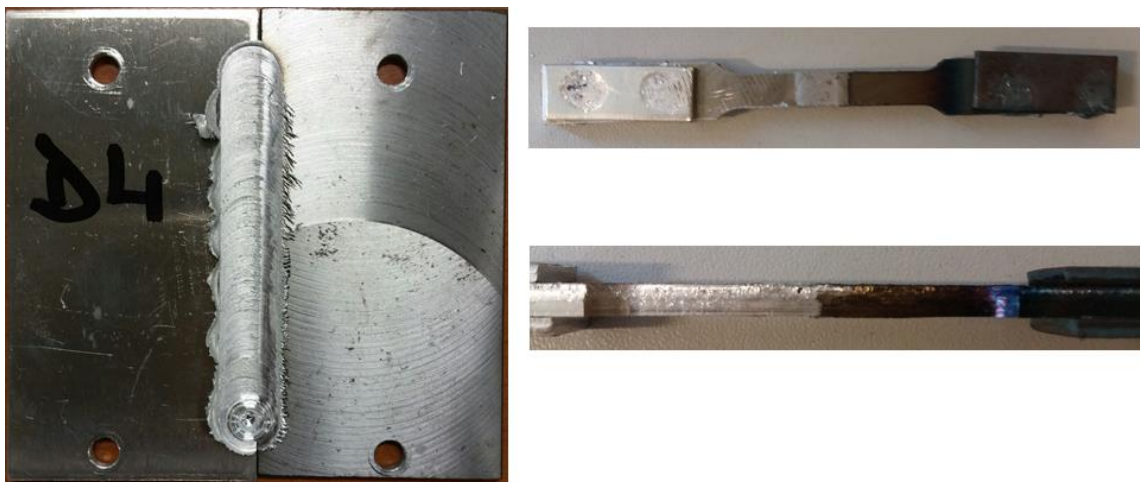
D4 sample after welding and after preparation for tensile testing
